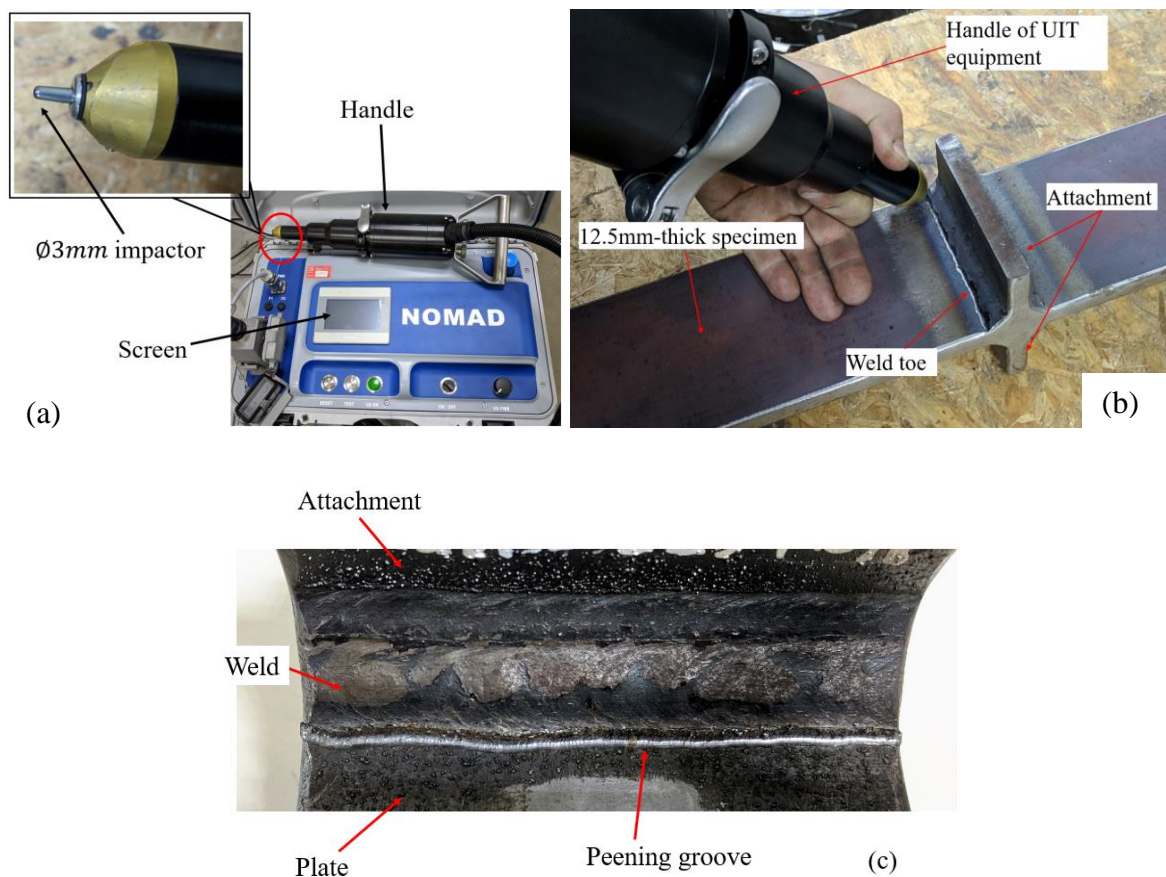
Ultrasonic Impact Treatment (UIT) on welded joints: (a) the Stressonic[®] NOMAD portable Ultrasonic Peening Equipment; (b) an example of the UIT process on 12.5mm-thick welded joint; (c) the groove after treatment along weld toe.
